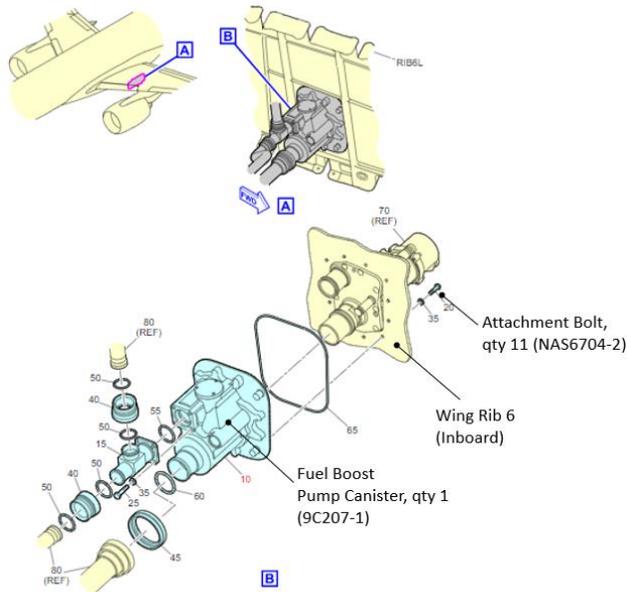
LHS Fuel Boost Pump Canister to Wing Rib 6 Assembly
